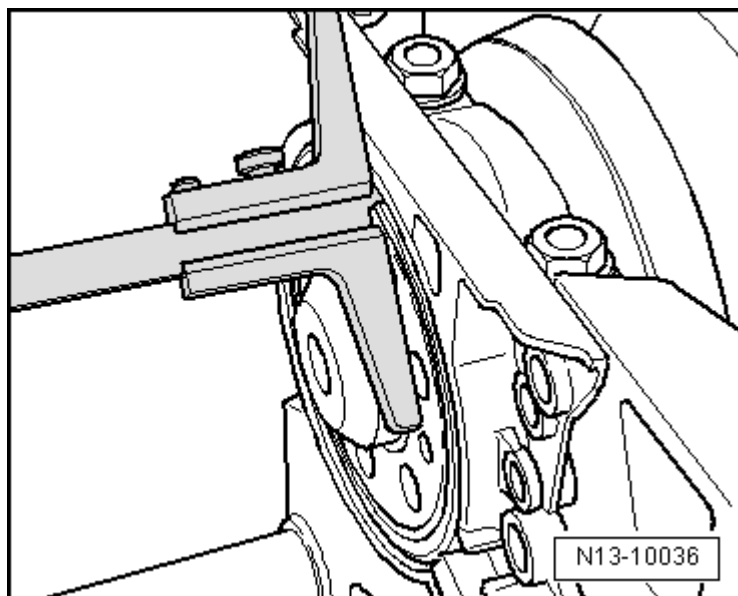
Identifying Caliper Gauge Set Onto Crankshaft Flange
